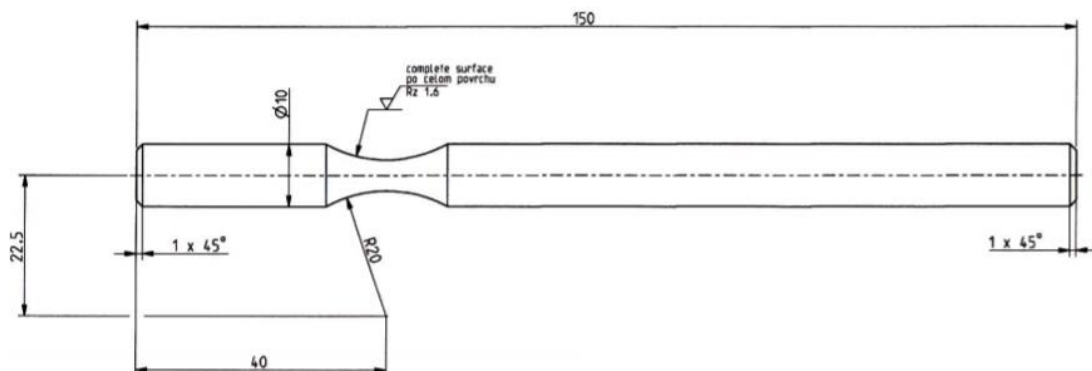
Geometry and dimensions of specimen for fatigue test.
